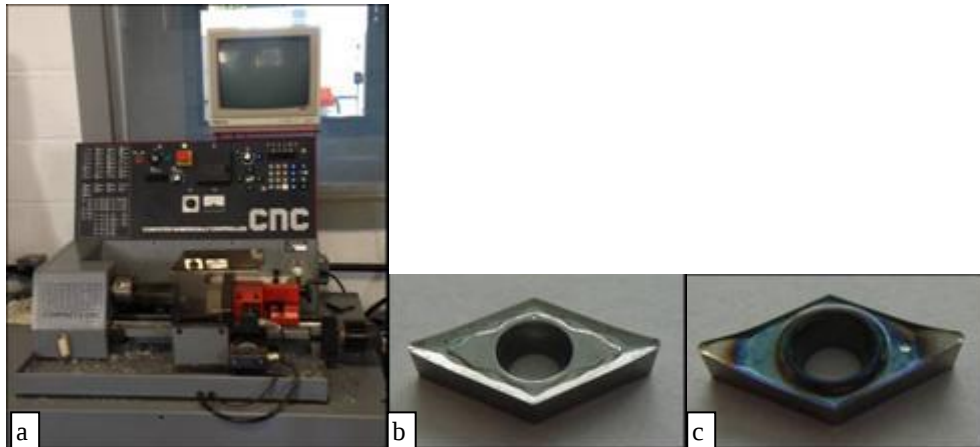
(a) CNC Emco lathe, Compact 5- Factor A; (b) Polished carbide insert; (c) Coated carbide insert with TiB_2
